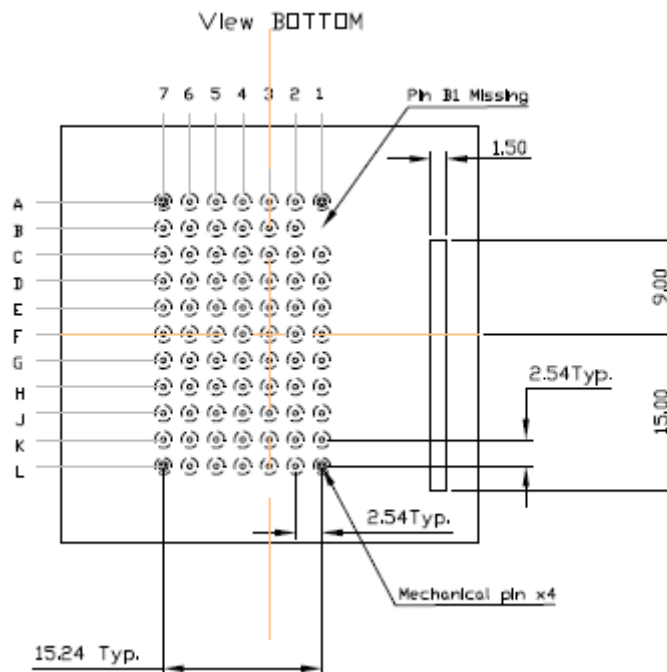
CASPEX 1.3M SWIR Camera Head Bottom View
